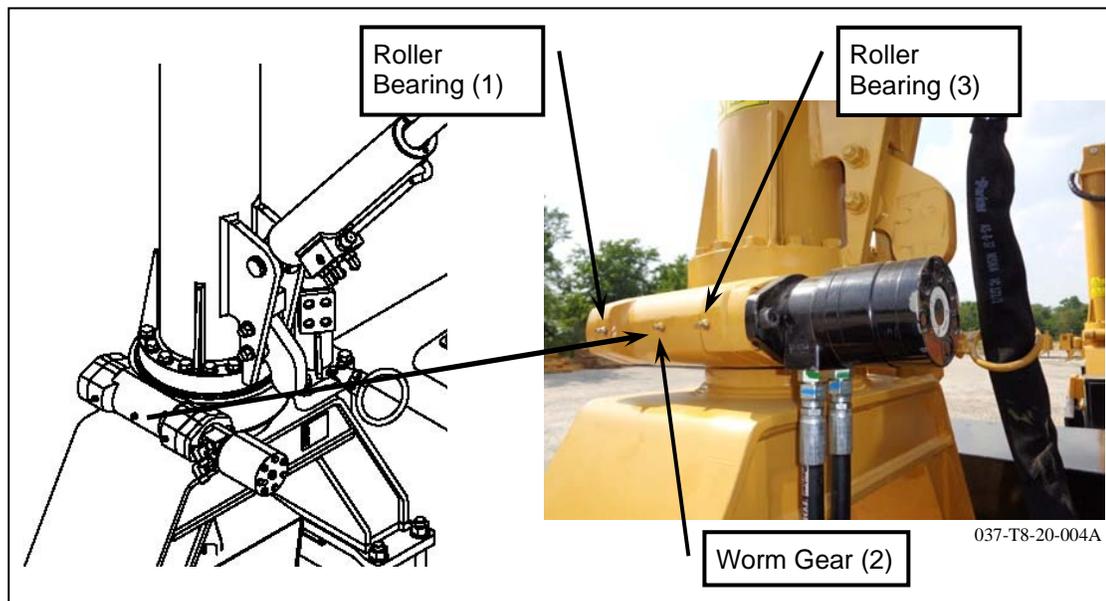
Slewing Drive Roller Bearing and Worm Gear lubrication location
